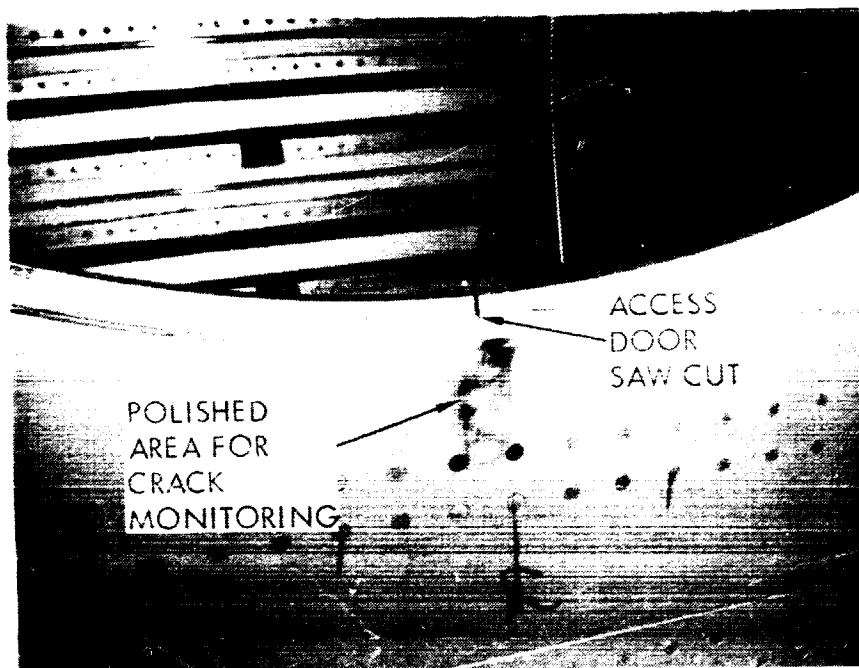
Saw Cut at Aft Access Door Flange - Lower Surface at W. S. 120
